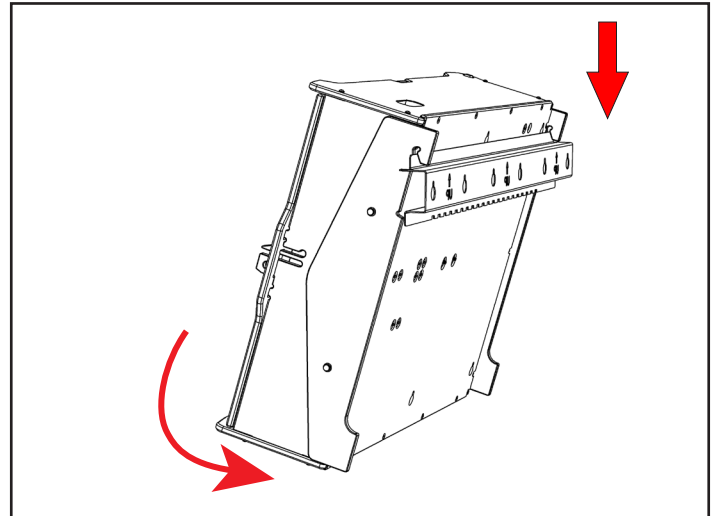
Mounting Cabinet to rail (shown with PBX-RAIL-M)
